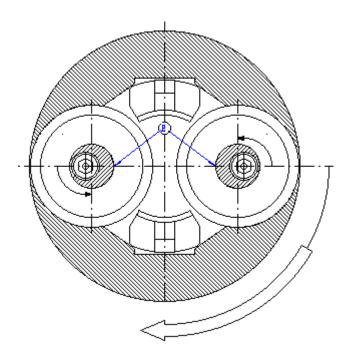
SZLH678 (768) MX granulating machine pressure roller regulation diagram
